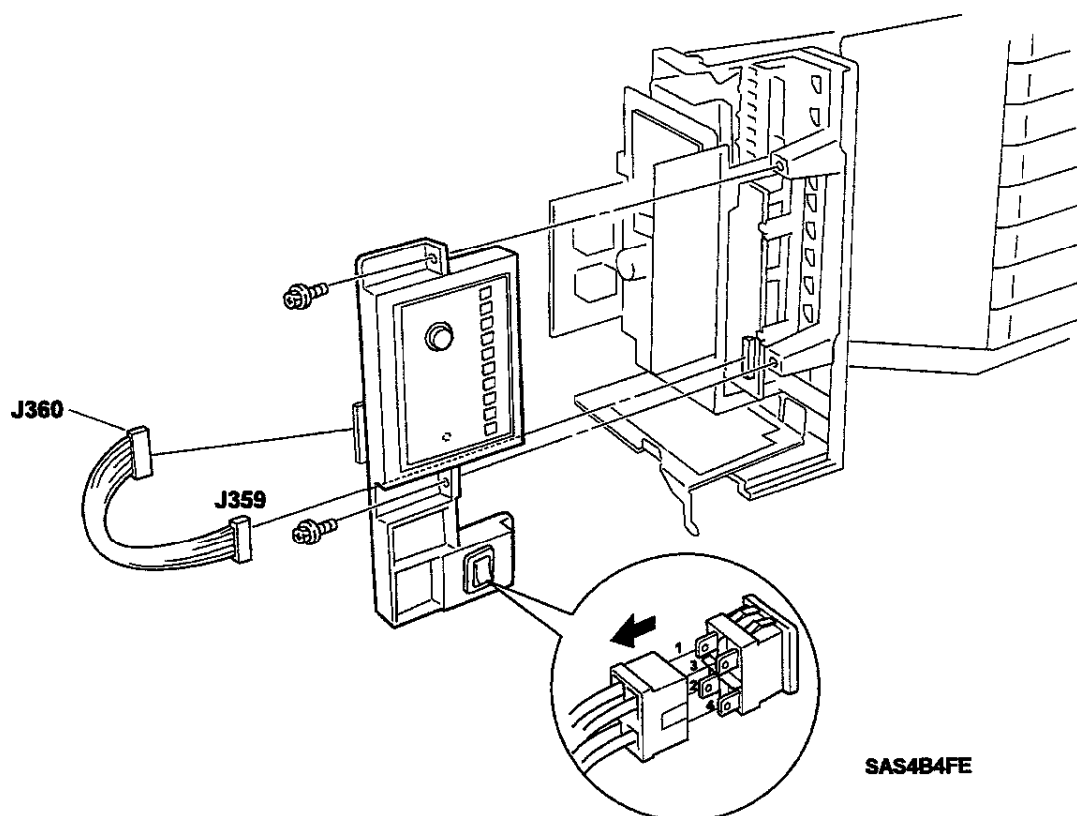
Removing the Indicator Panel Assembly/Main Switch
